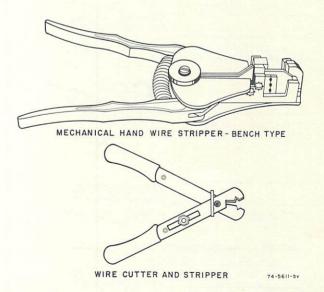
Typical Hand Tools for Cutting and Stripping Wires.
